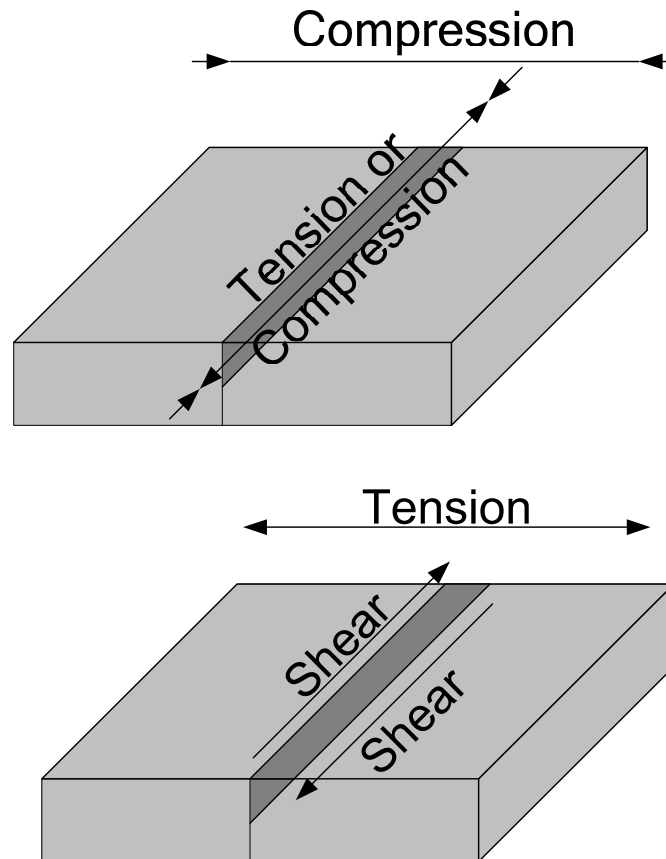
PJP Groove Weld Factored Resistance
